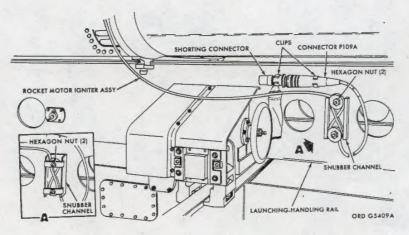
Igniter cable assembly stowed in snubber channel.
